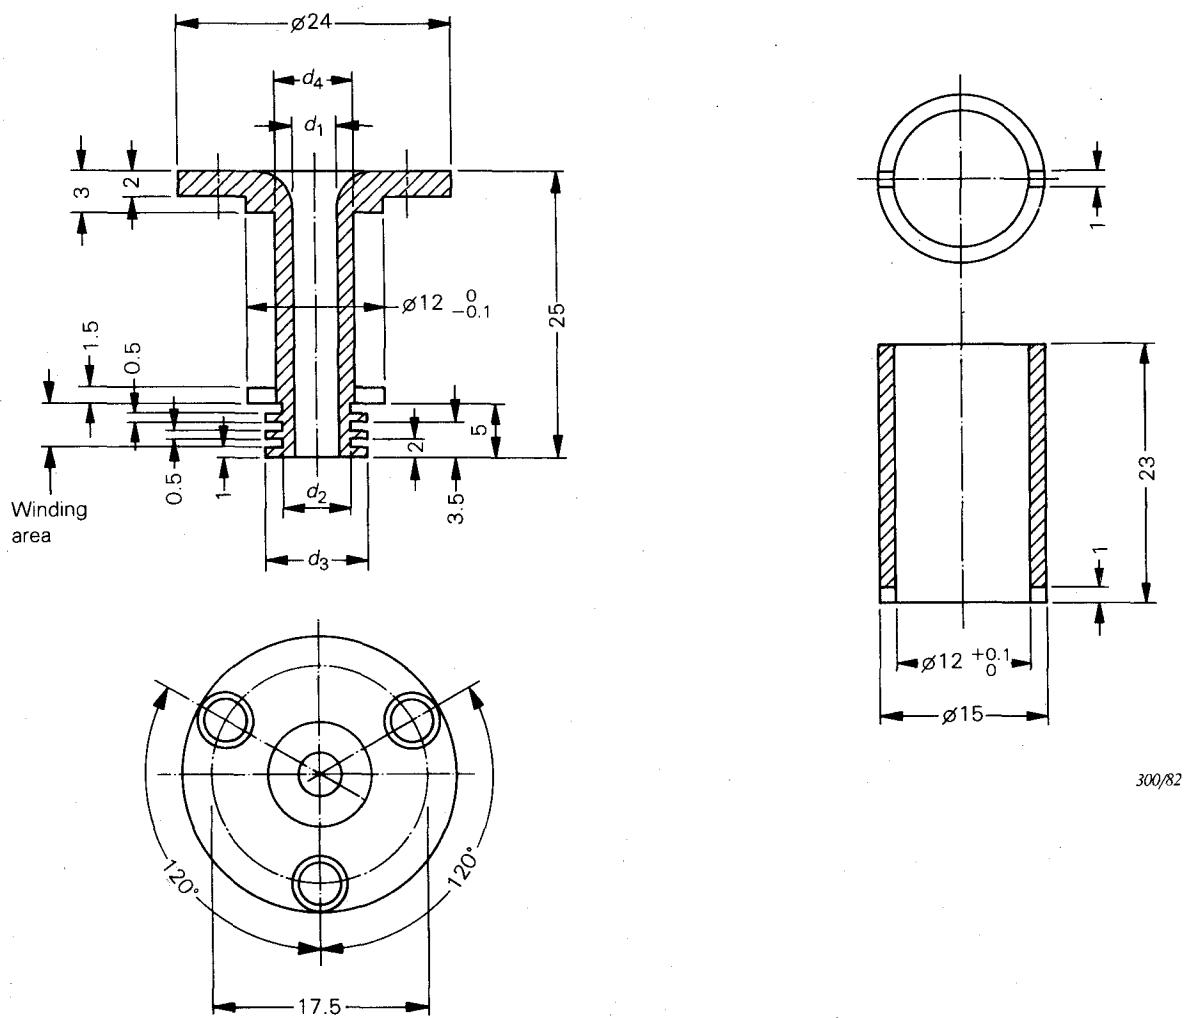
Coil former and protecting tube (dimensions in millimetres).
